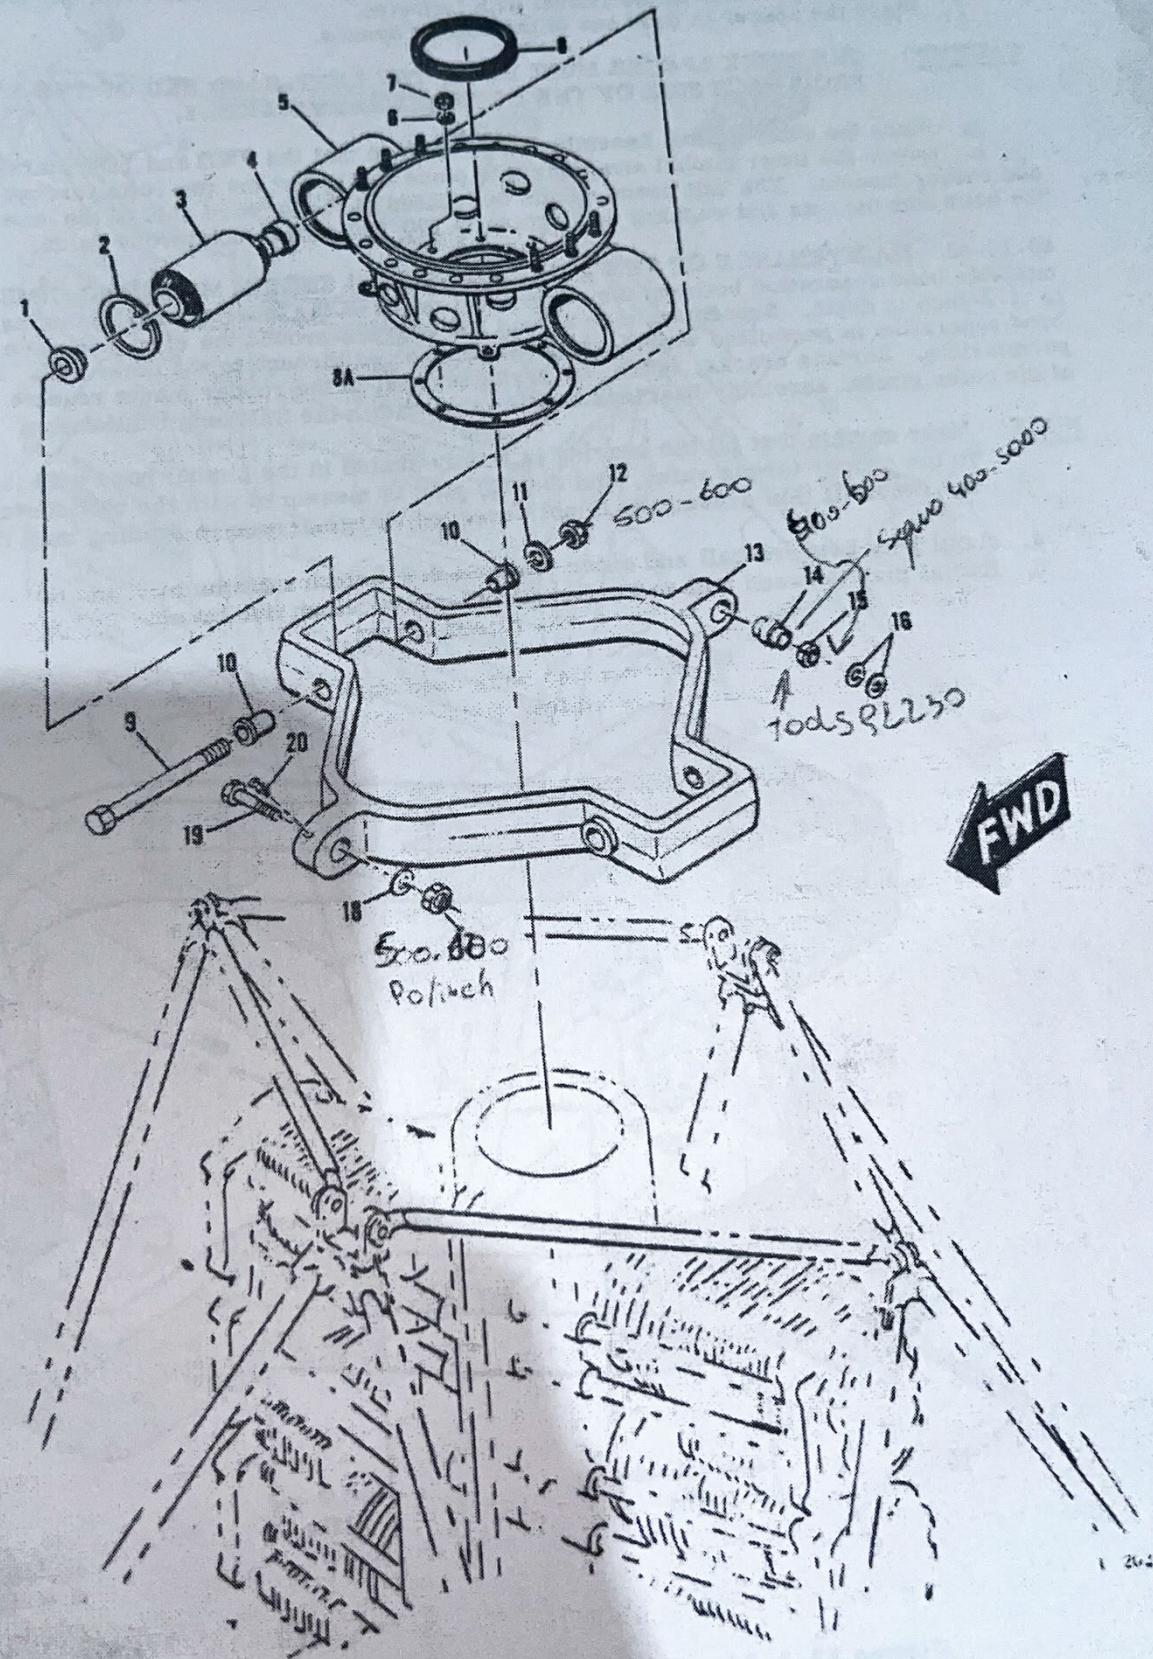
Engine Mounting Gimbal Assemblies
